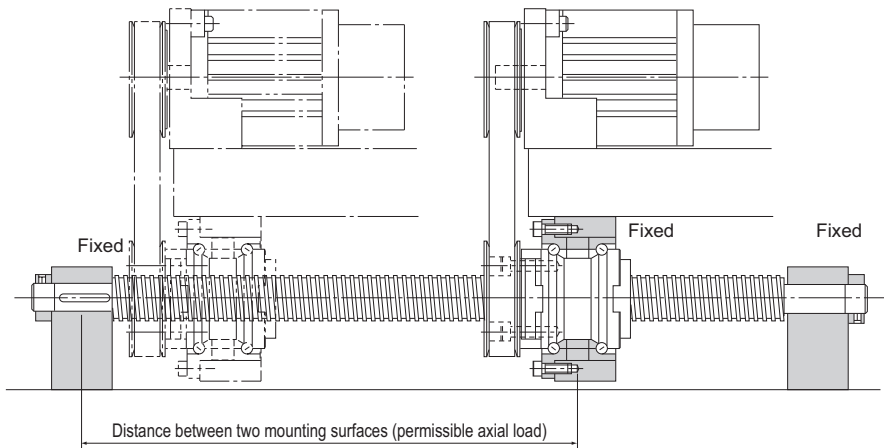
Screw Shaft Mounting Method for Rotary Nut Ball Screw: Fixed - Fixed
